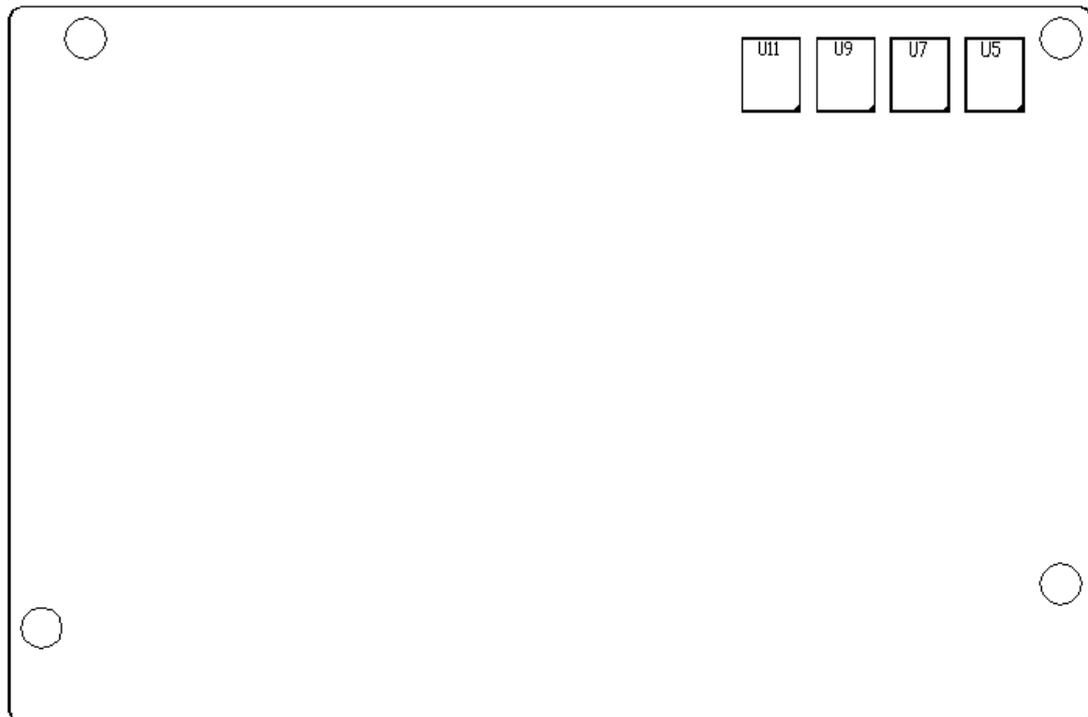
Jumpers and Connectors Location\_ Board Bottom
